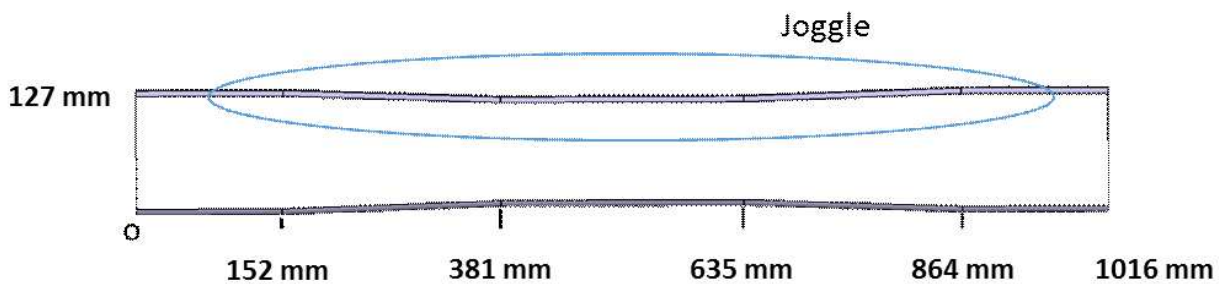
Hot Drape Forming C-Channel Tool (top view)
